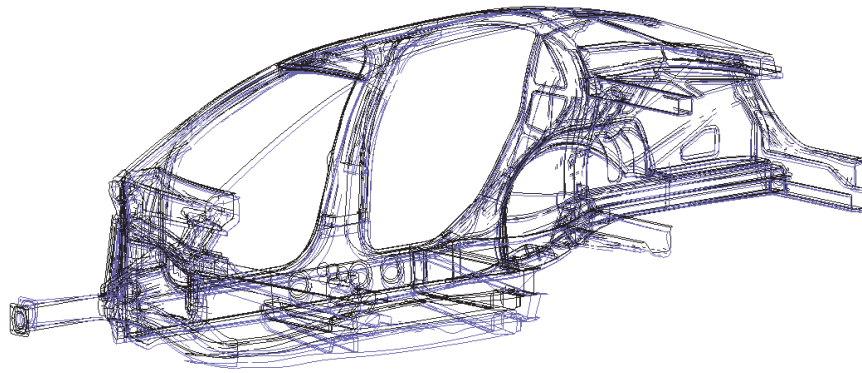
PNGV-Class static bending deformed shape
